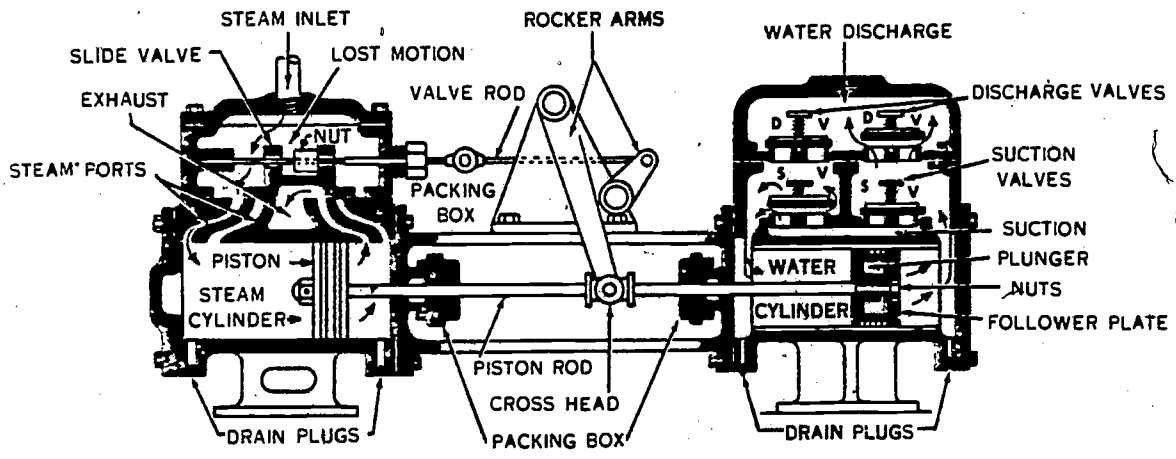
Cutaway view of a duplex steam reciprocating pump.
